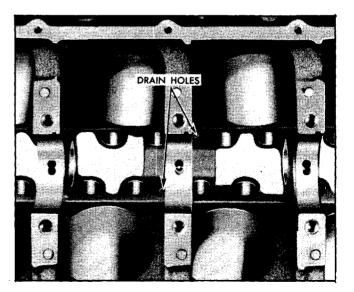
Drain Holes Under Lower Crankcase Ventilator Baffle
